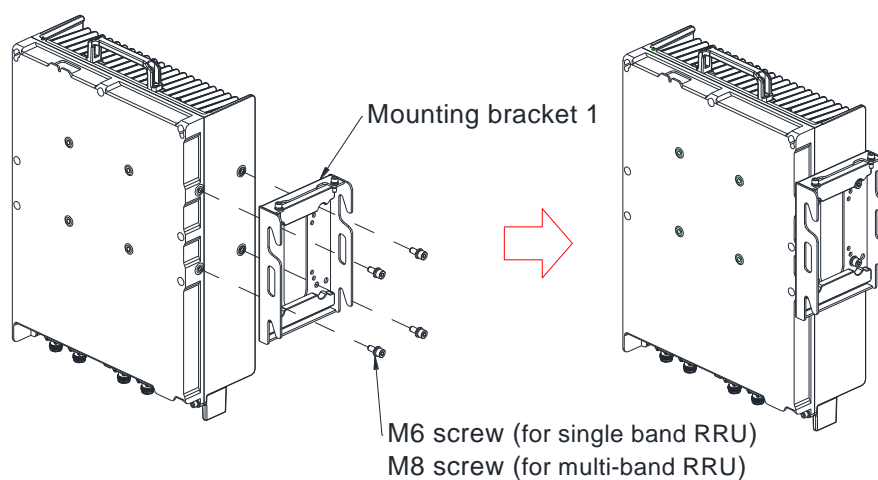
Fix Bracket 1 on RRU, Blade Mount
